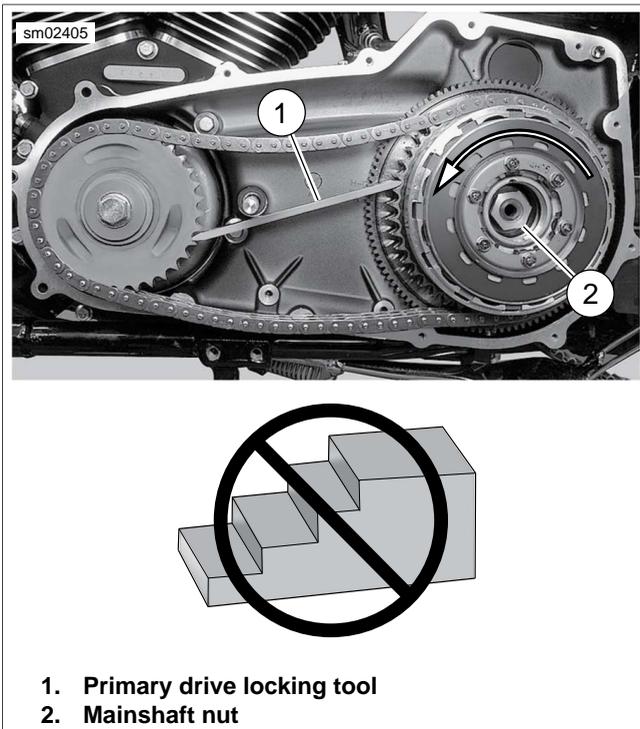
Installing Clutch Hub Mainshaft Nut
